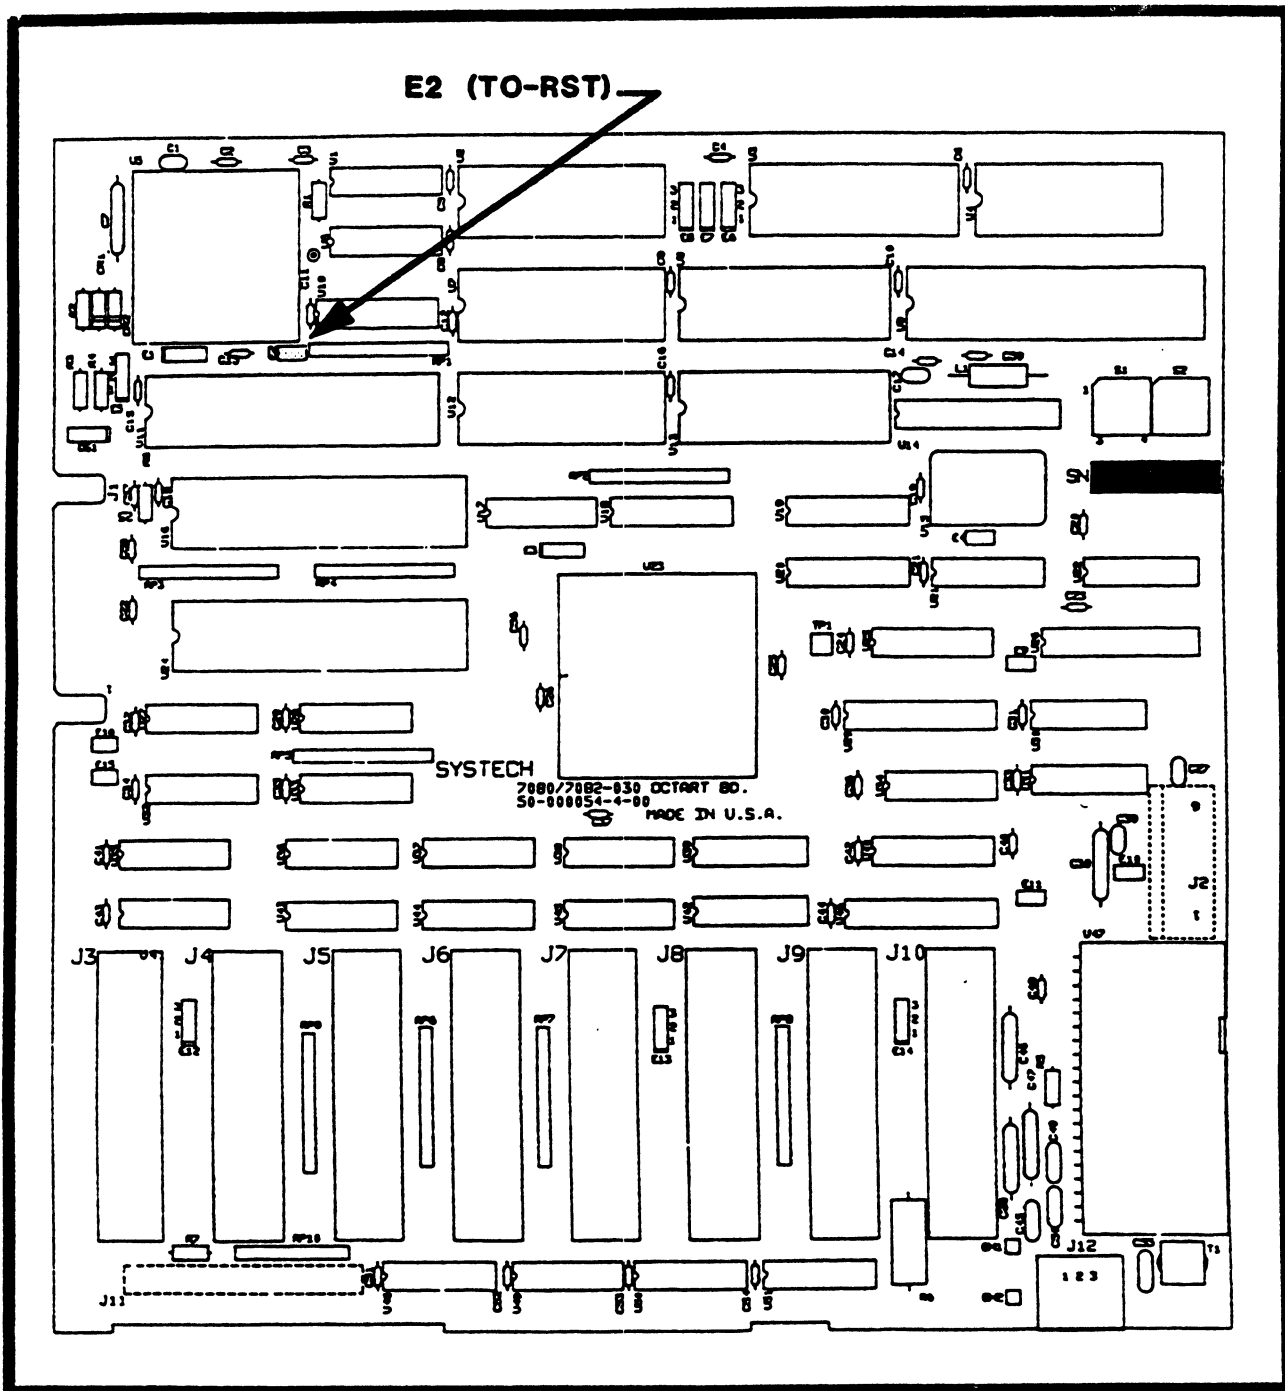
TO-RST Jumper on HPS-7080-030 and HPS-7082-030 Cluster Controllers
